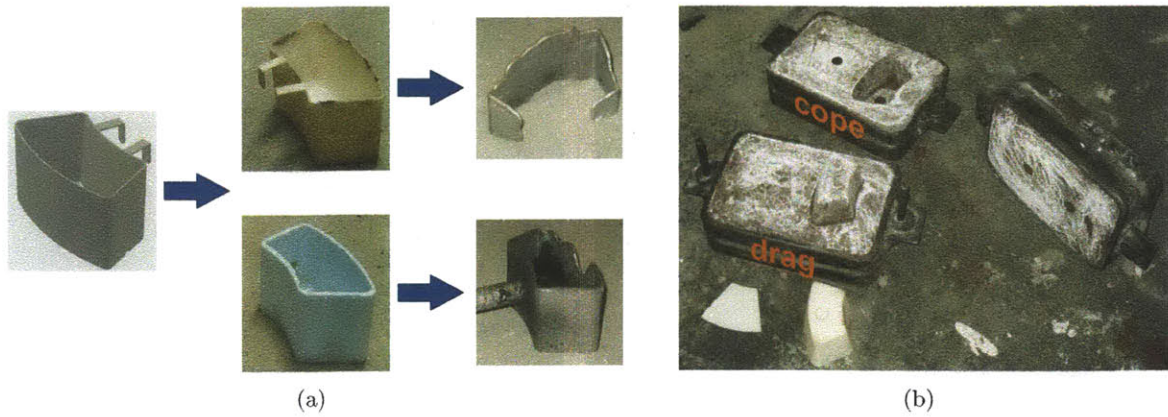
(a) The casting process begins with a digital model and can proceed to a physical part by using a foam or 3D-printed intermediate. (b) Packed sand molds just prior to final assembly and pouring of the molten metal.
